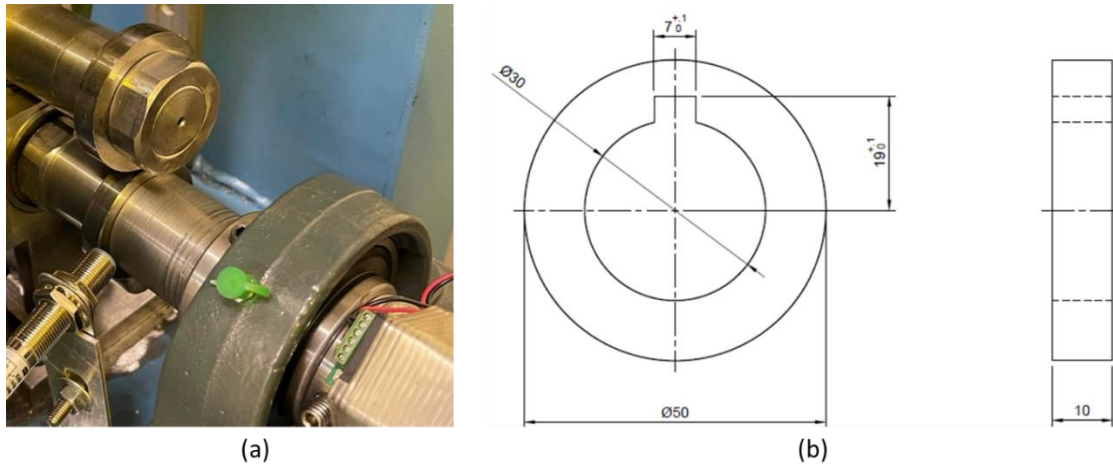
(a) Wear test rig configuration, (b) dimensions of the wheel and rail disc specimen.
